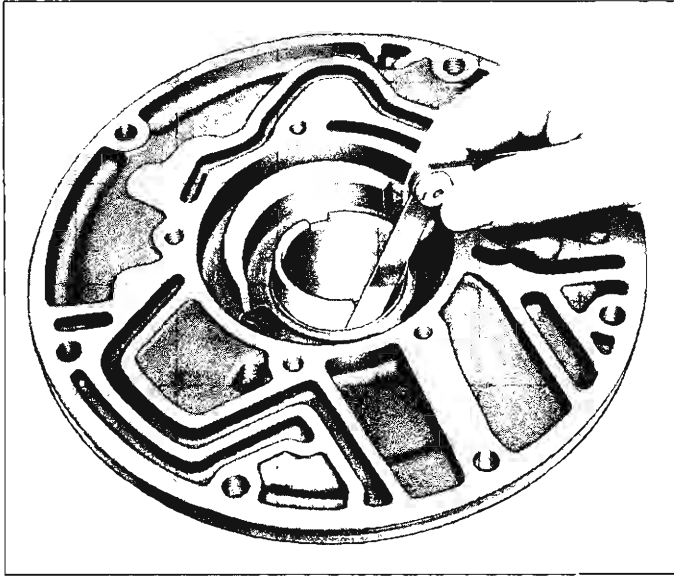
Checking Pump Body Bushing to Converter Pump Hub Clearance
